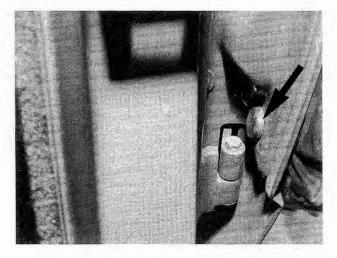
Mounting nut for rear door body side molding is beneath rubber plug (arrow).
